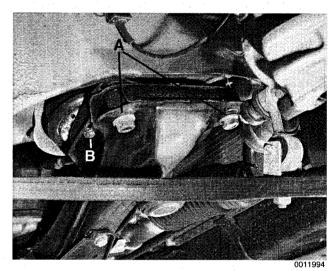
Suspension crossmember bolts (A) and lower engine mounting nut (B). Right side shown.
